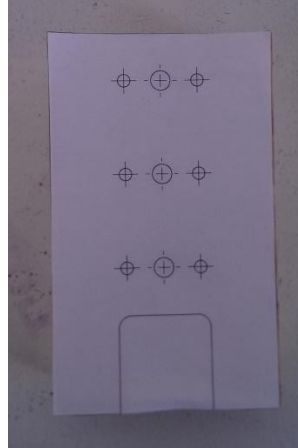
SolidWorks Drawing Printed And Cut To Full Scale
